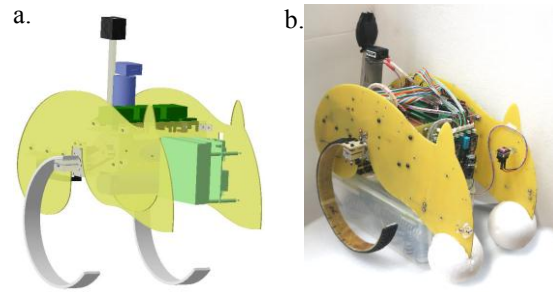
The CAD drawing (a) and the photo (b) of the robot.
